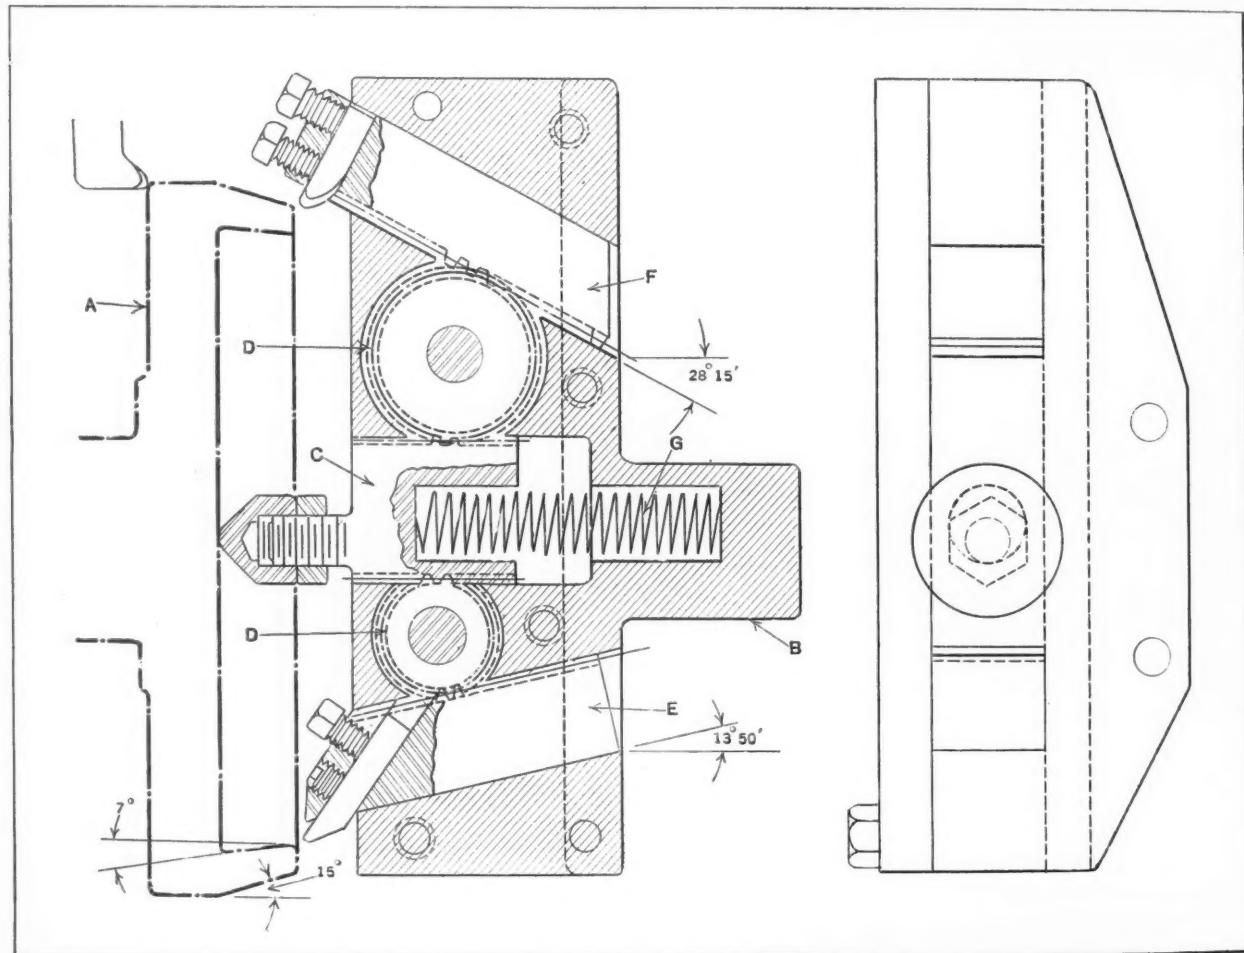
Clip-forming Die or Punch Equipped with Mechanical Ejector
